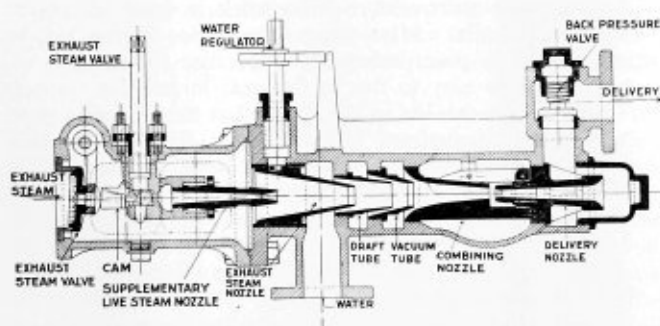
Details of Type "F" Exhaust Steam Injector
